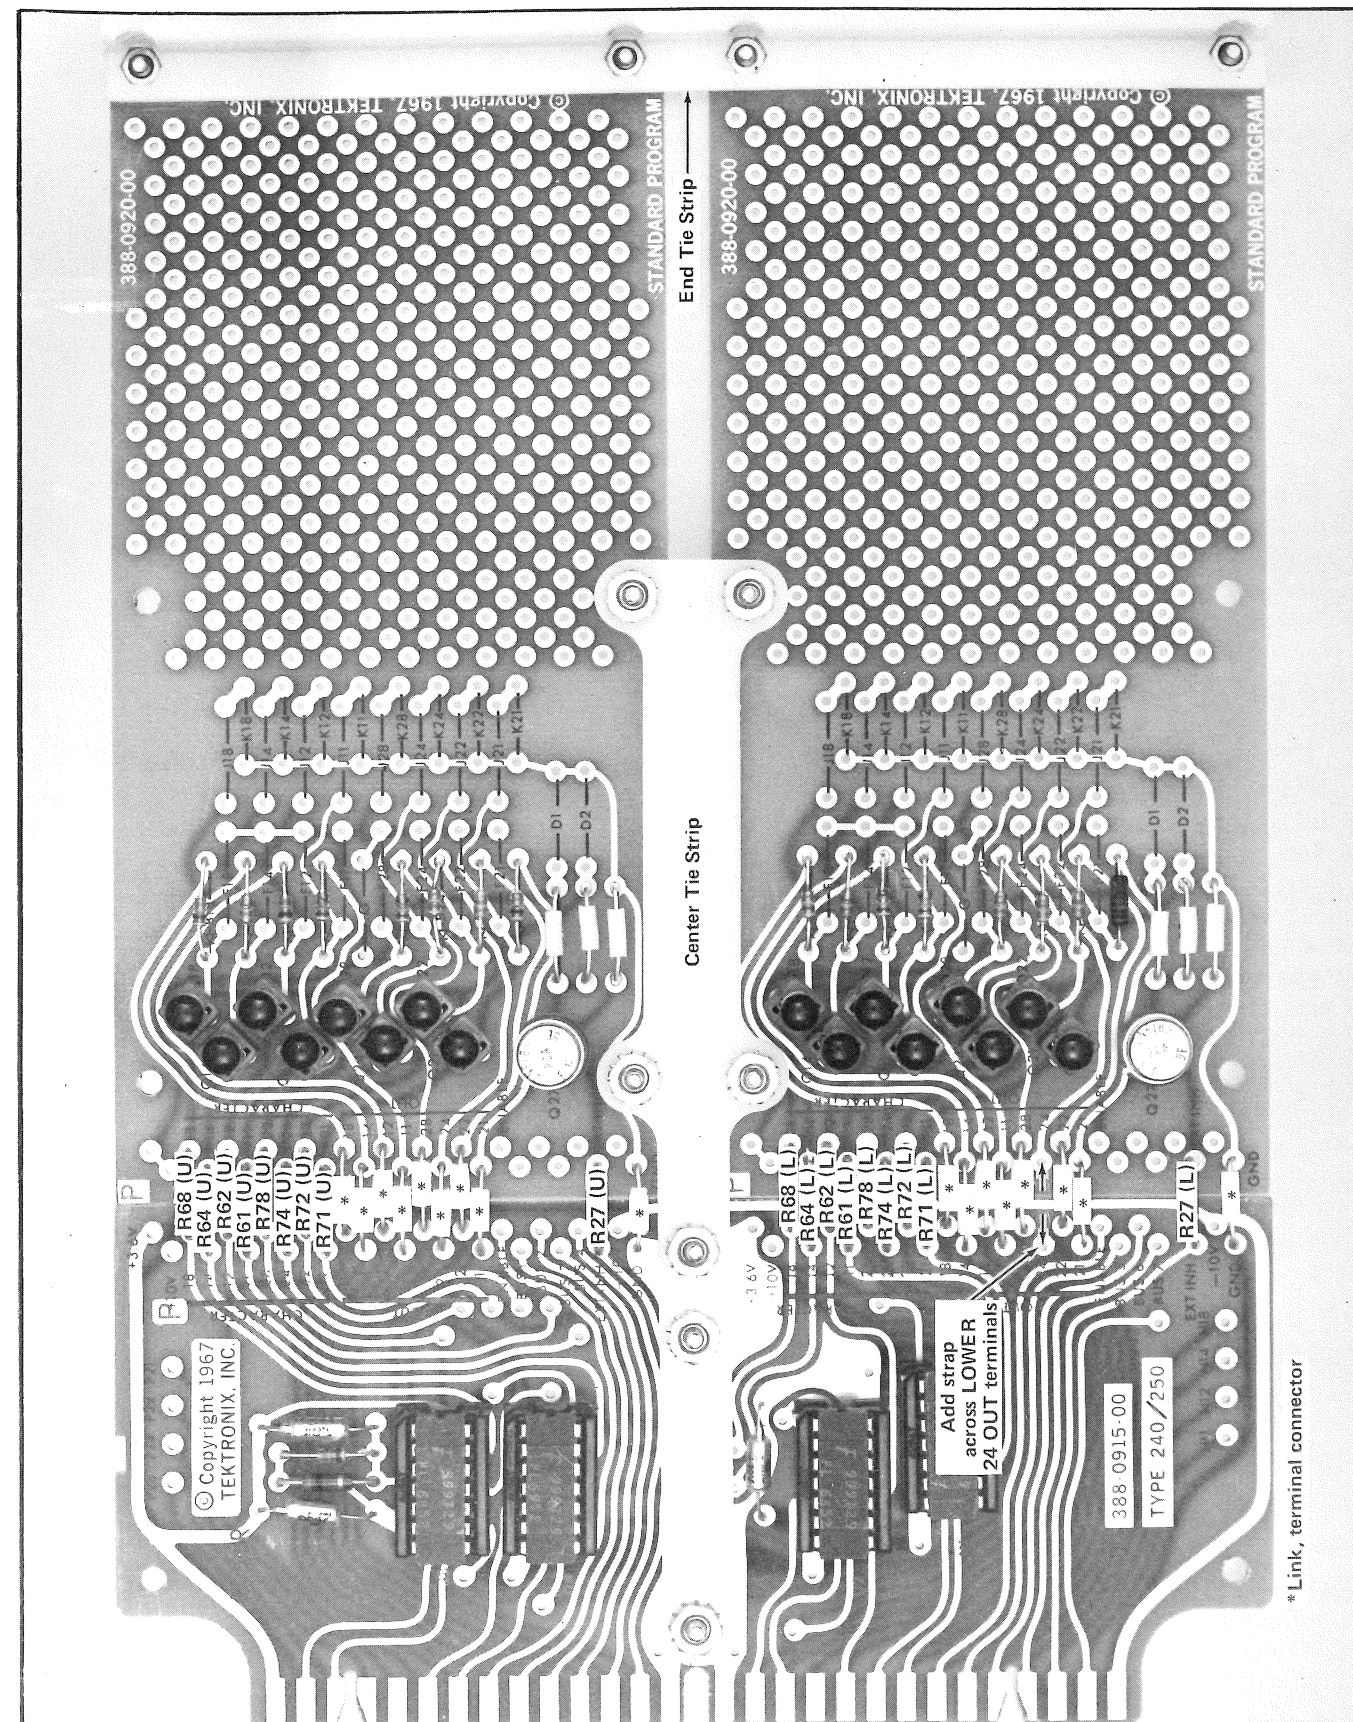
Modification of Type 240 P4 Program Assembly.
